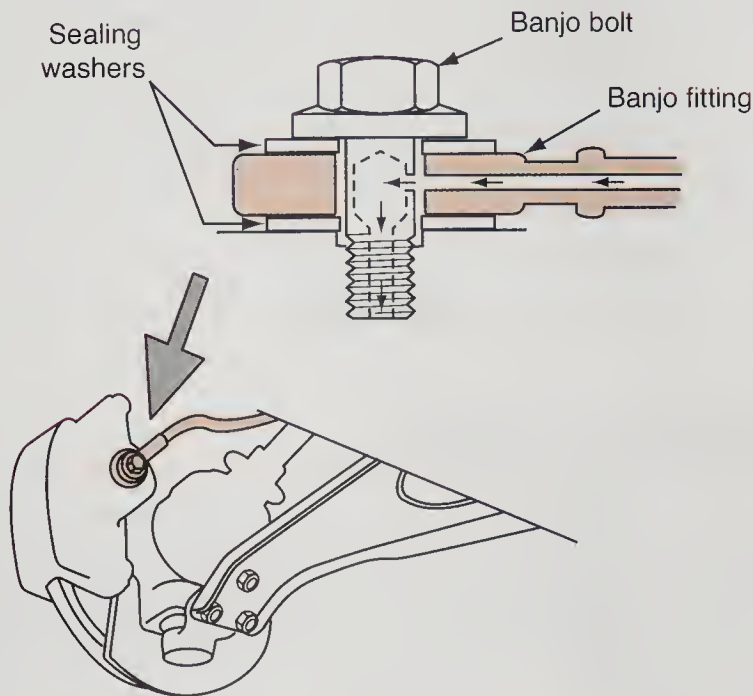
Banjo fittings are typically used at right-angle connections.
